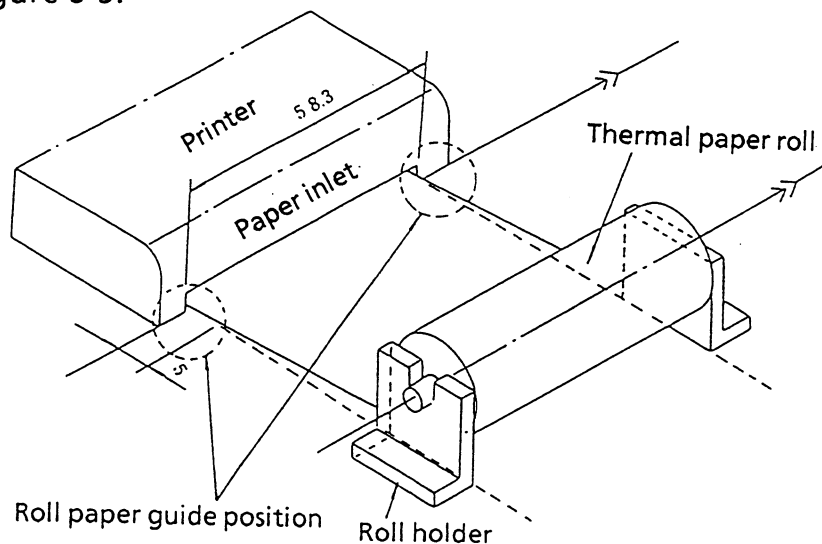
Thermal Paper Roll Holder Attachment Position (With Core)
